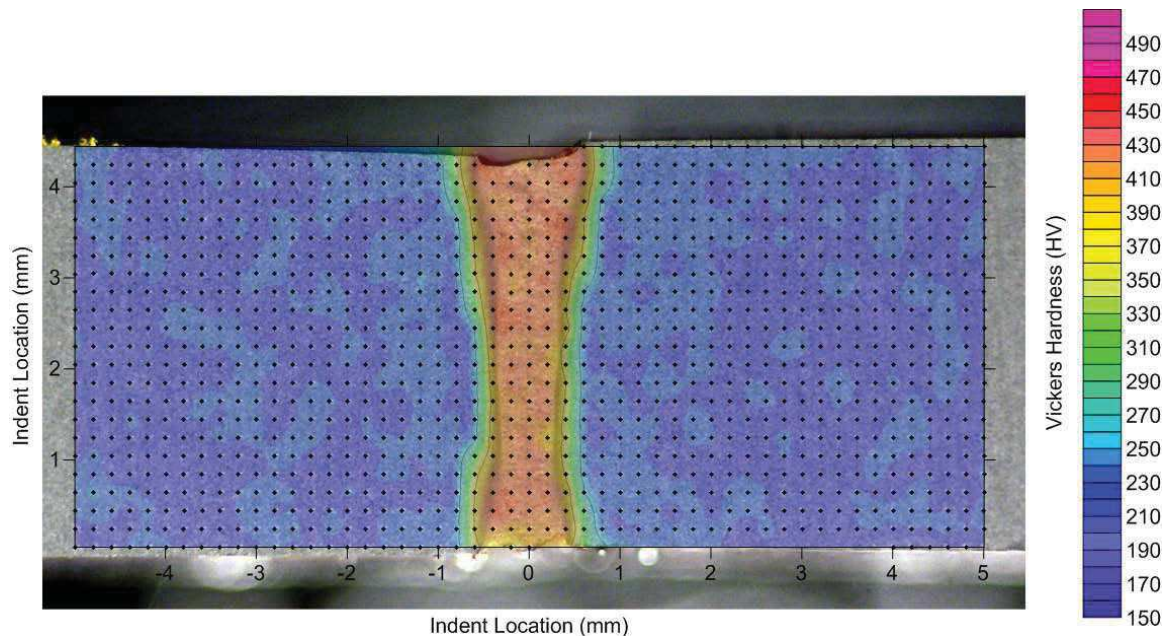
Hardness map superimposed on macroscopic image for weld labelled 170209-1 (5 kW 66.7 mm/s). The weld fusion zone has a near constant hardness.
